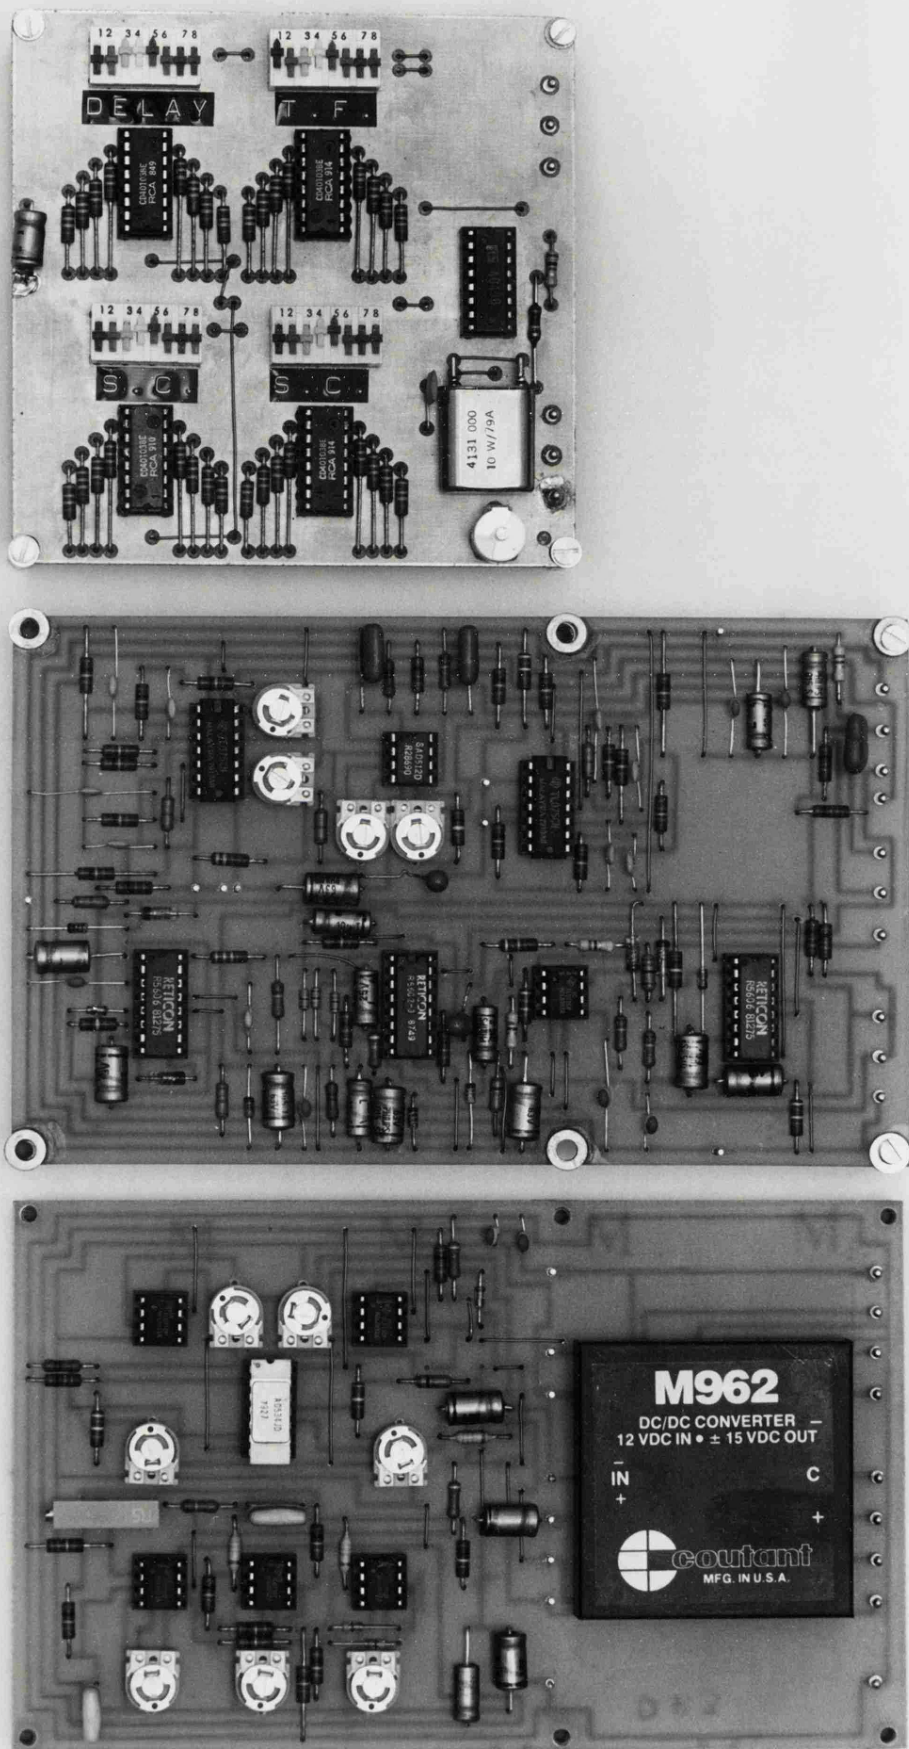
Photograph of the 3 BFFAGC PCB before final assembly
